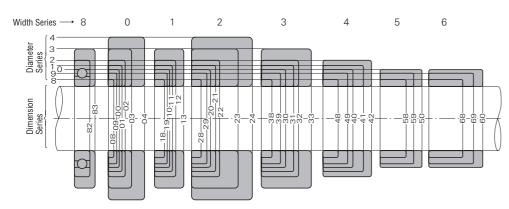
Comparison of Cross Sections of Radial Bearings (Excluding Tapered Roller Bearings) for Various Dimensional Series
